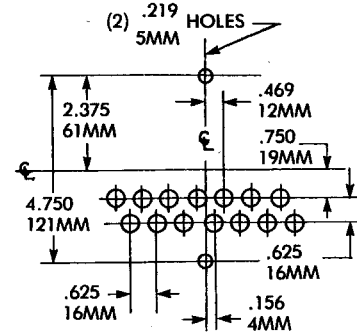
Panel drilling for surface mounting for Type C1 case relays on panels larger than 0.188 in. (5mm) thick
